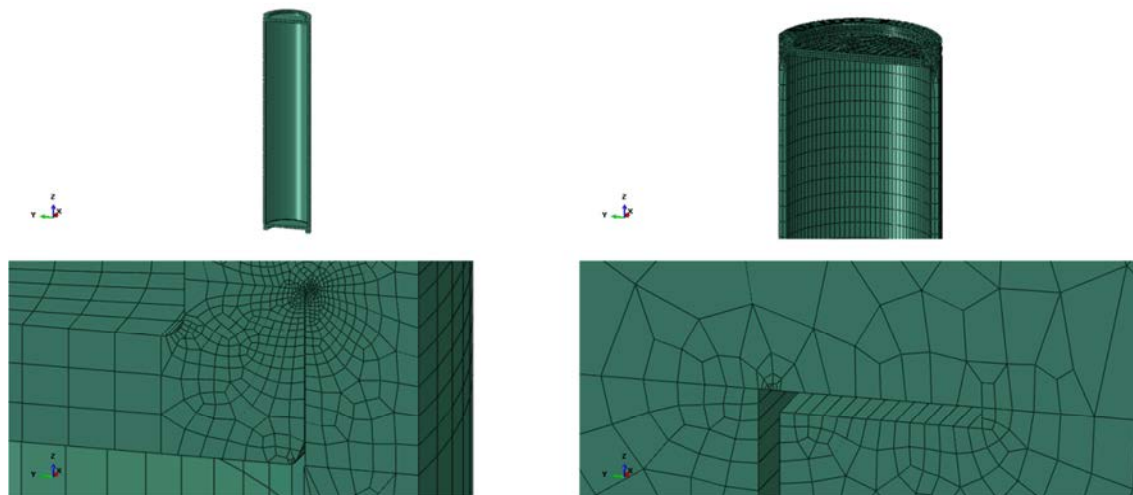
Copper shell geometry (top left), mesh (top right), weld mesh (bottom left) and weld root (bottom right).
